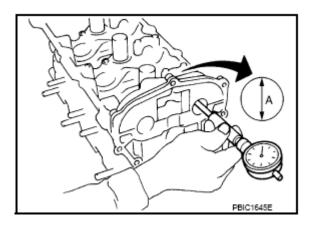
Measuring Inner Diameter Of VVEL Ladder Assembly (EXH Side) Using Bore Gauge
